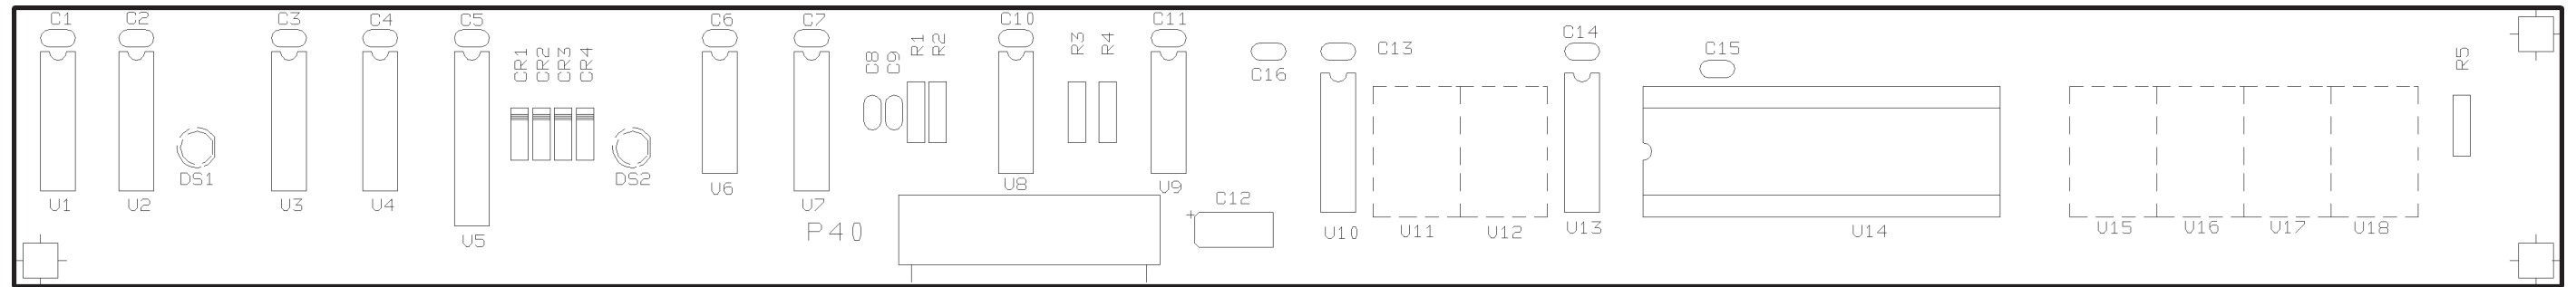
Display Printed Circuit Board Assembly, PN 78178 Revision 4
